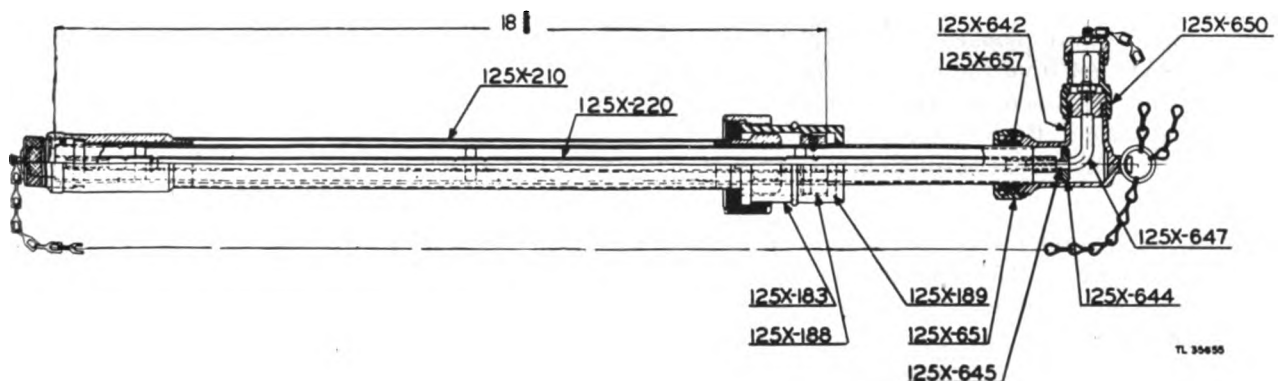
Tower TR-24-A, solid coaxial line assembly.
